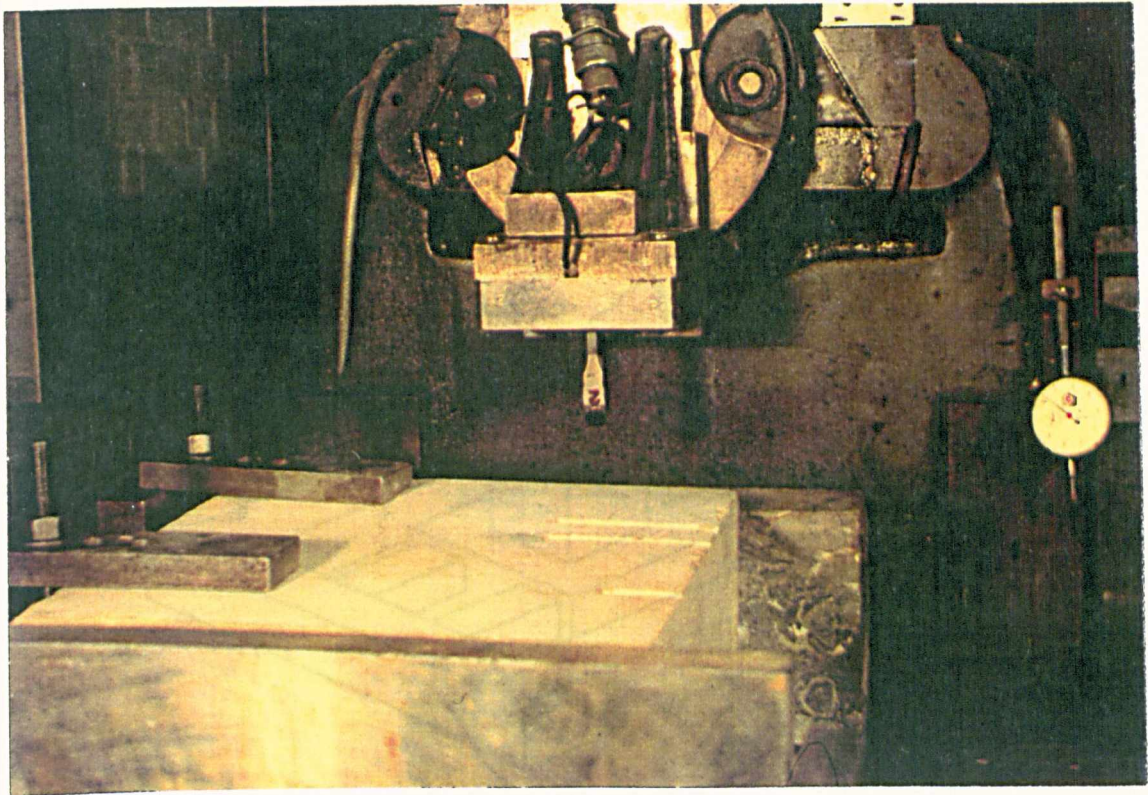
G.S.P. Shaping Machine with PDC tool and dynamometer.
